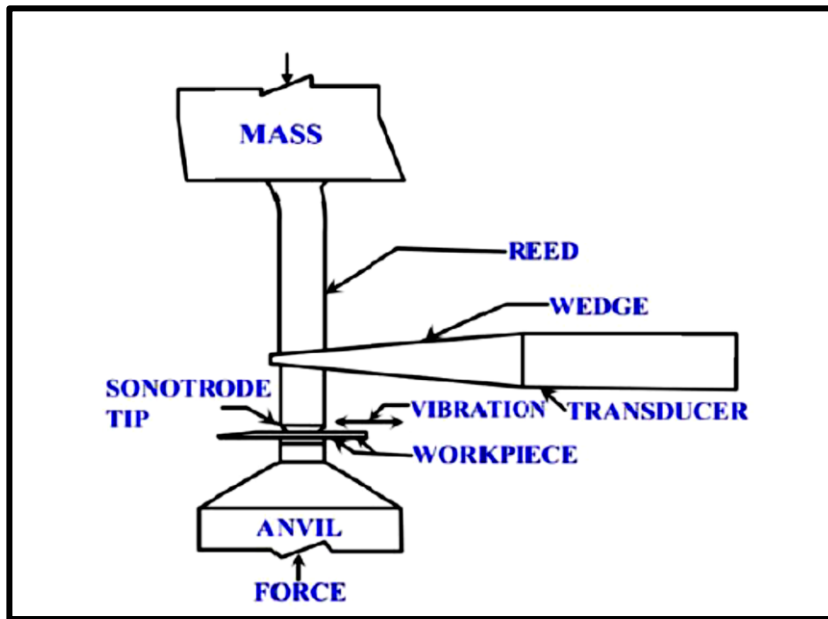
Wedge-Reed Ultrasonic spot Welding system
